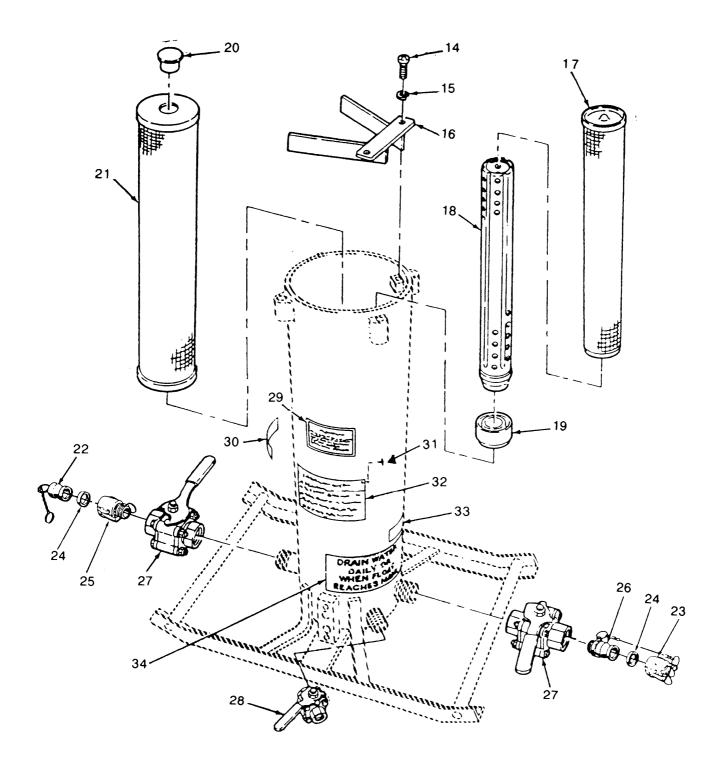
Vessel and Skid Assembly (Sheet 2 of 2)
